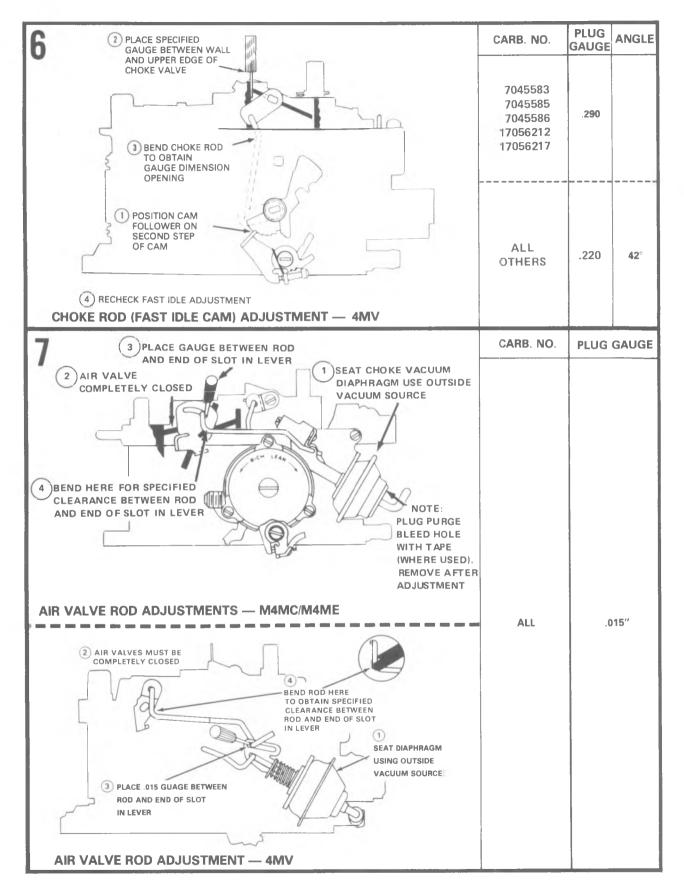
C-49--M4MC/M4ME/4MV Carburetor Adjustments-3 of 8
